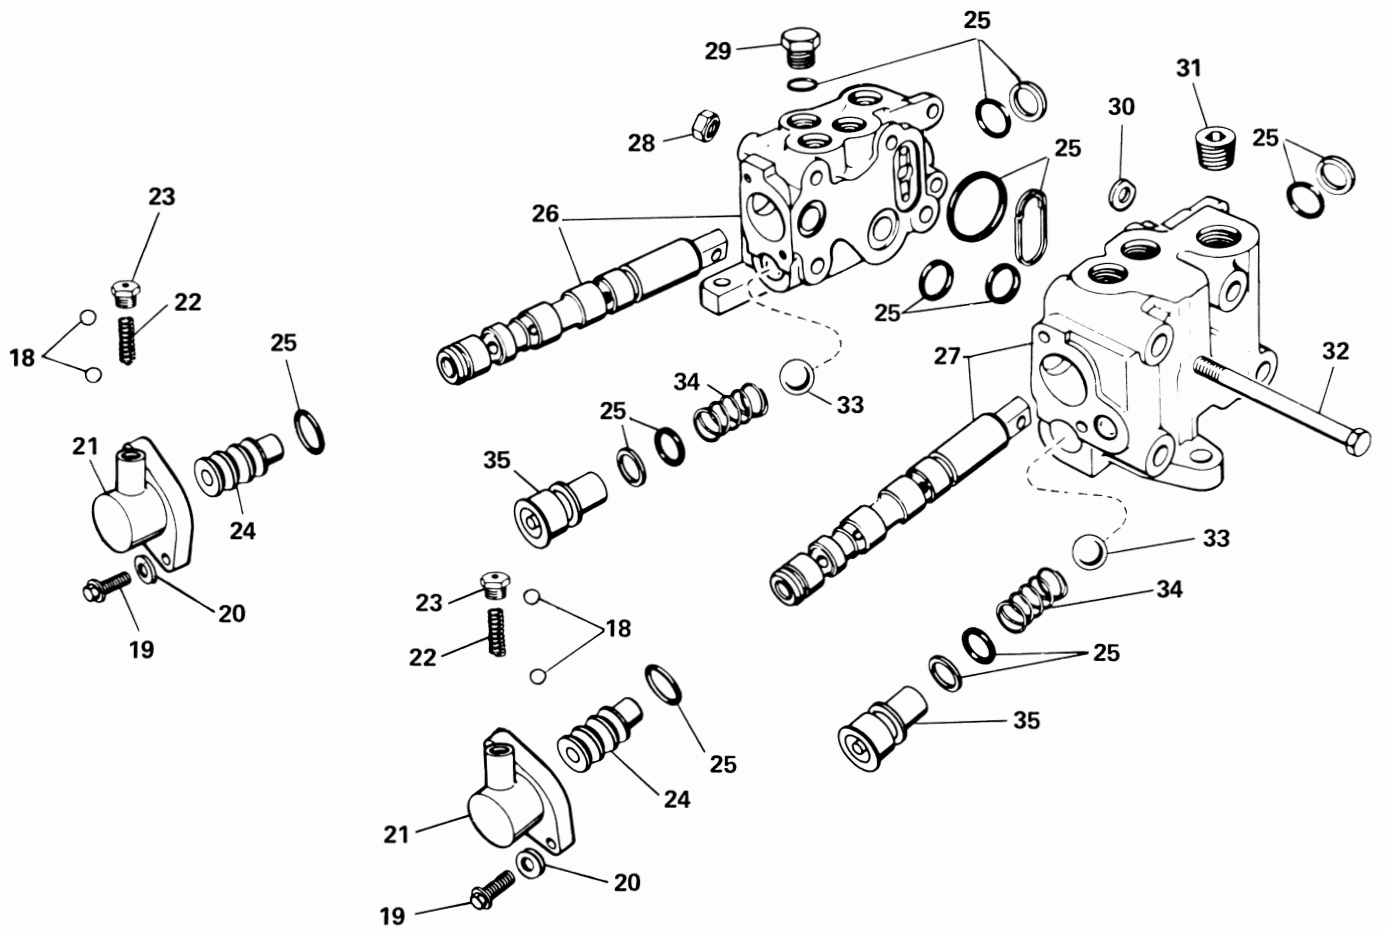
LH Direction Control Clamp Valve Assembly (Sheet 2 of 2)
